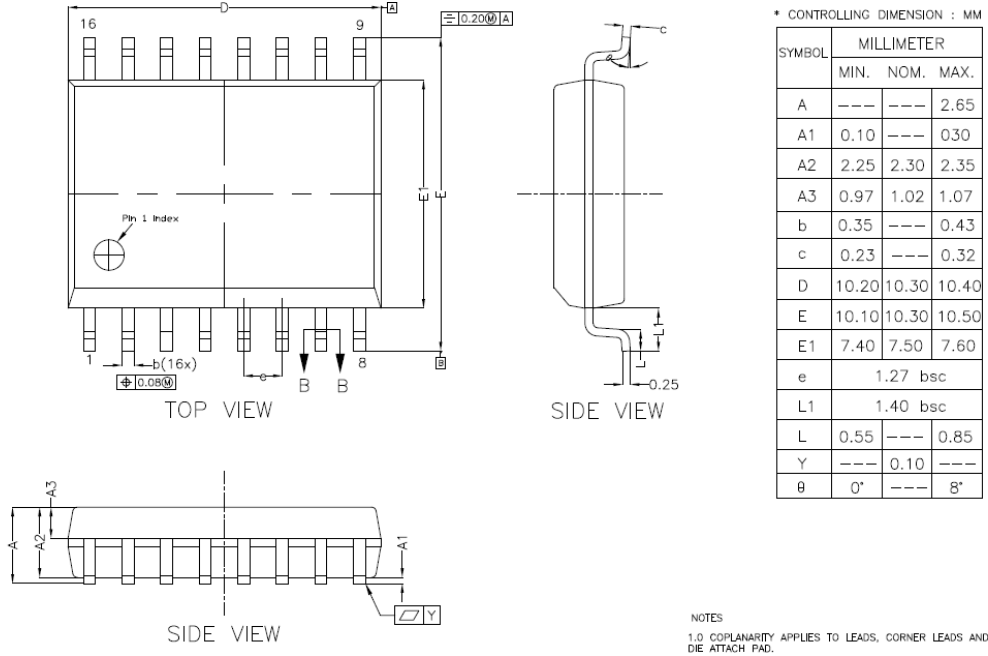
SOW16 Package Shape and Dimension in millimeters
